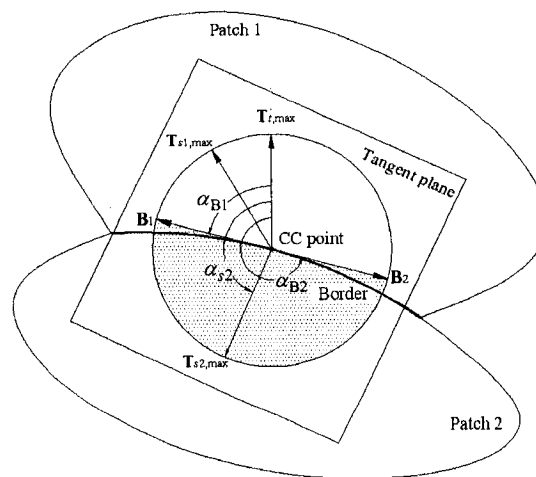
Illustration of compound surface machining using a bull-nose end-mill.
